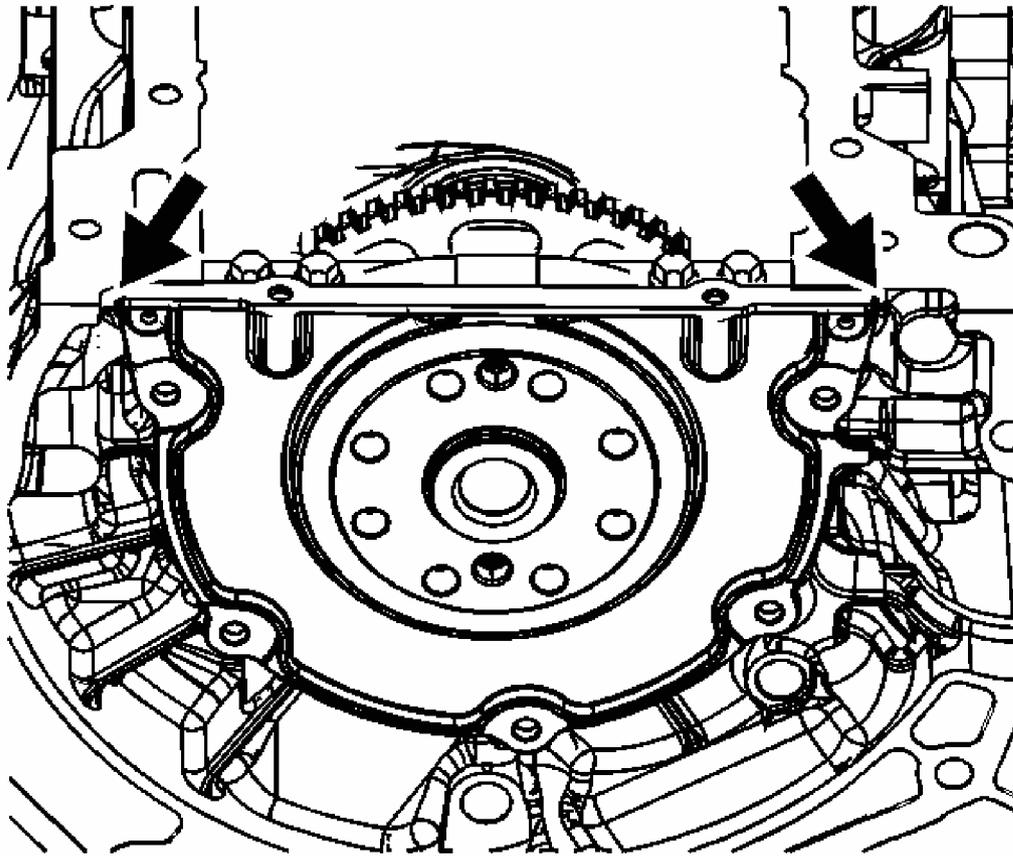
Identifying Pry Points On Edge Of The Crankshaft Rear Oil Seal Housing
